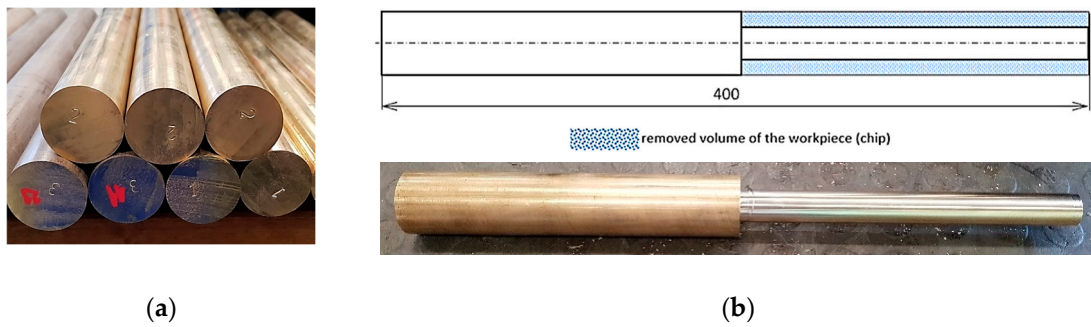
Workpiece (a) rods provided by the supplier; (b) machined part.
